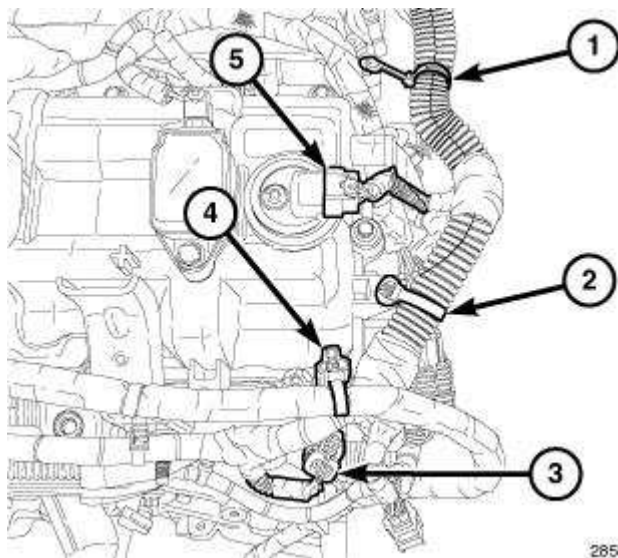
ECT Sensor Connector, CMP Sensor & Main Wire Harness Retainers
